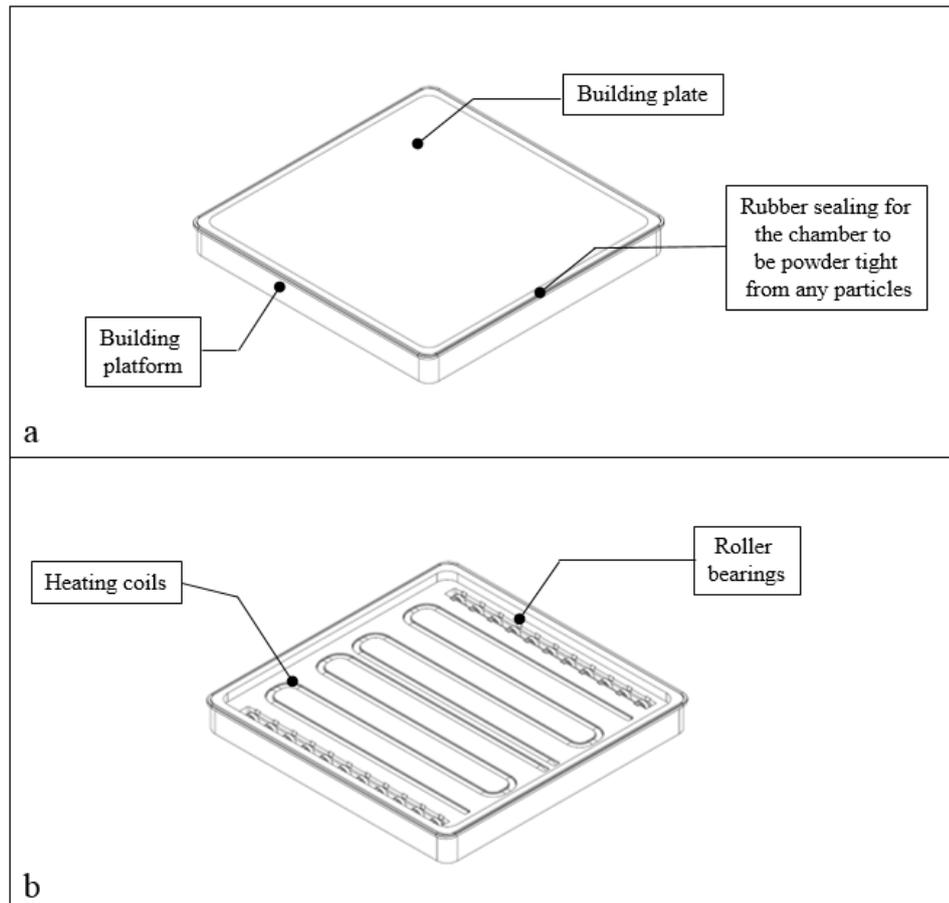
a) Building platform with rubber sealant and build plate and b) Heating coils with roller bearings (mod. Hotset 2015).
